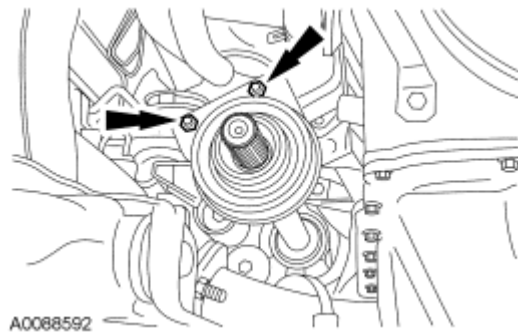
Locating Intermediate Shaft Retaining Nuts
